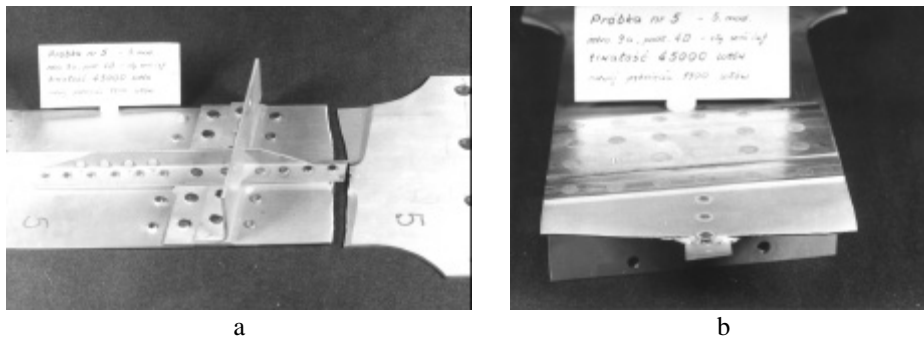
The course crack in specimen 1.2.2pm_{prim}, a – view from the stringer site, b – the fracture.
